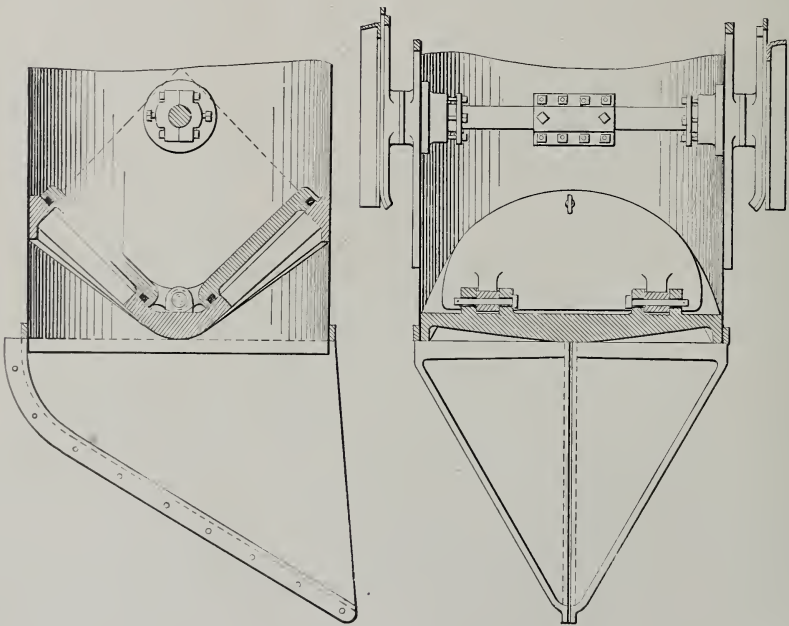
THE SUSQUEHANNA COAL COMPANY'S TANK WITH BOTTOM DISCHARGE CASTING.
